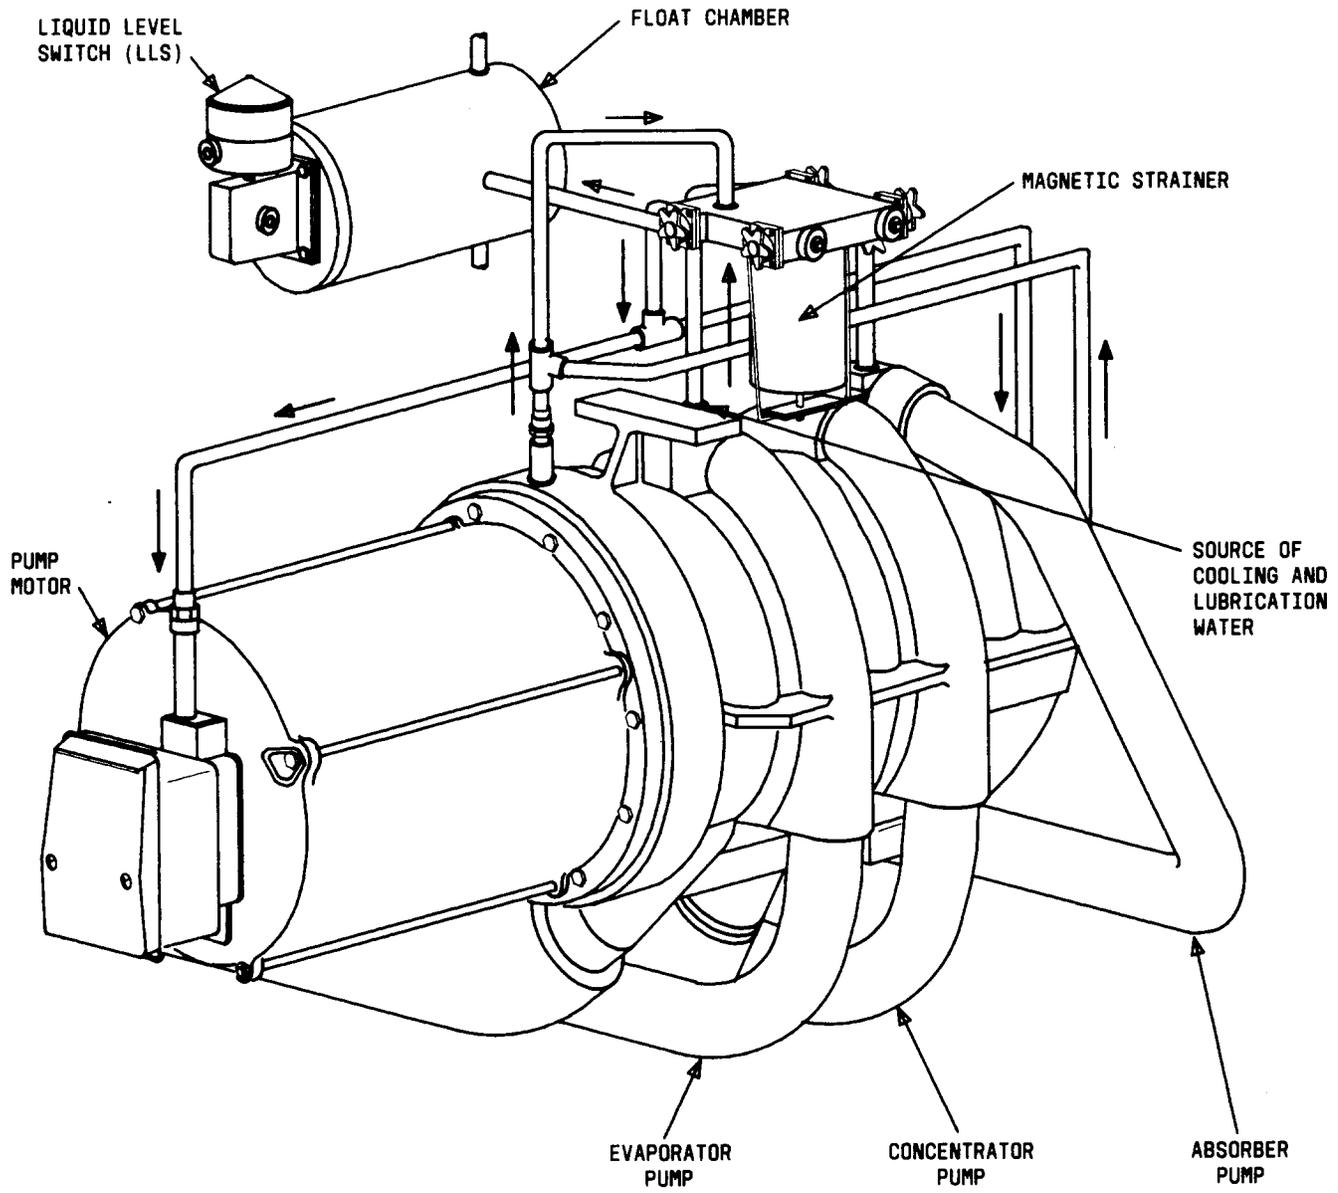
Pump Motor Lubricating and Cooling Circuit
